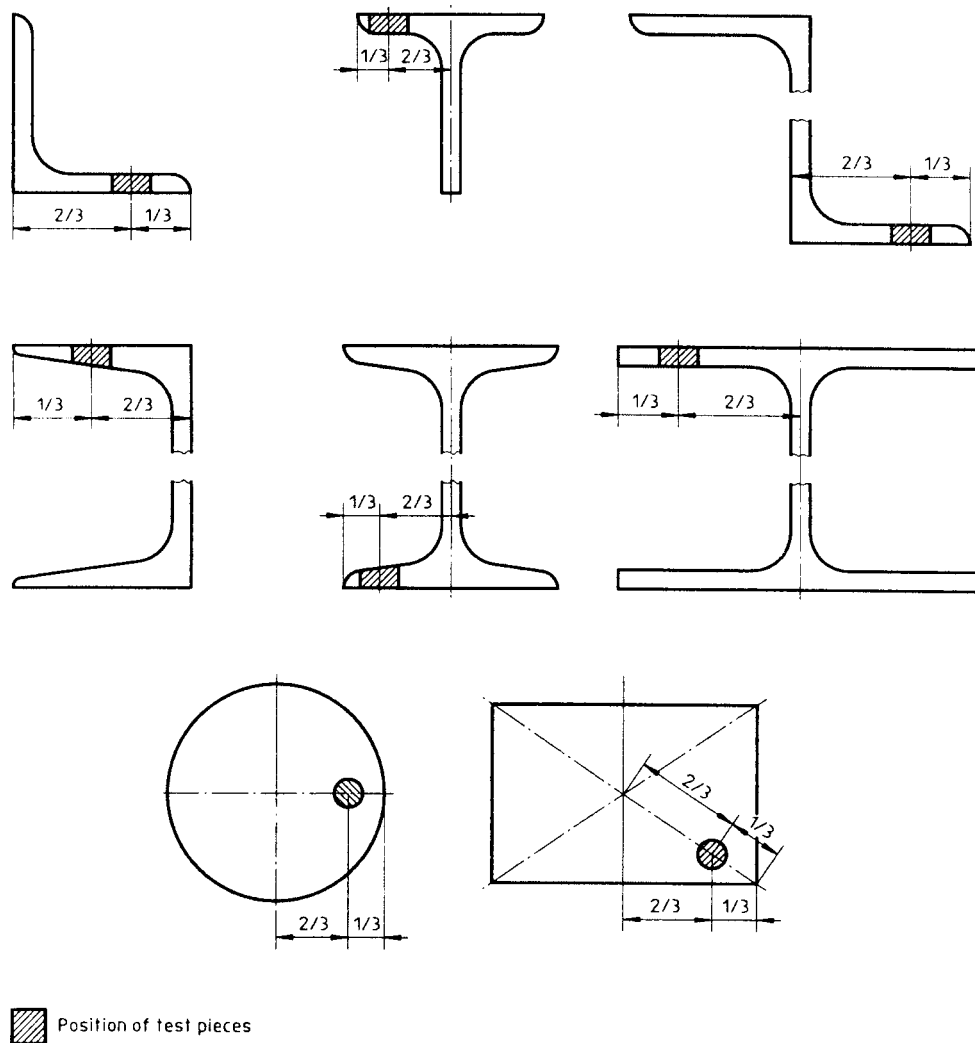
STRUCTURAL STEEL SECTIONS, POSITION AND ORIENTATION OF SAMPLE
